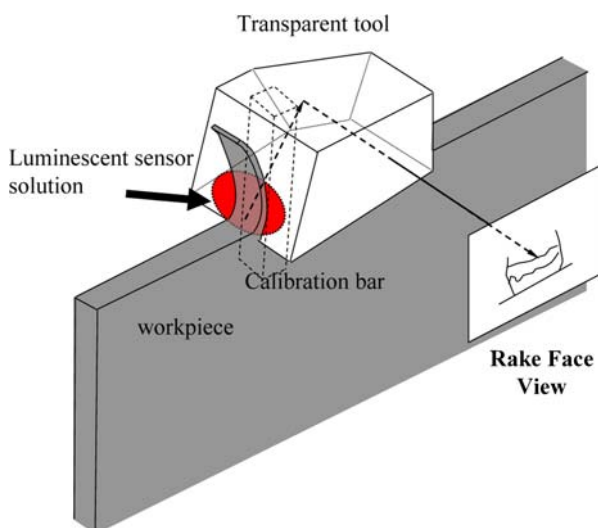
Schematic of set-up for direct observation of tool rake face when machining with a sapphire tool
